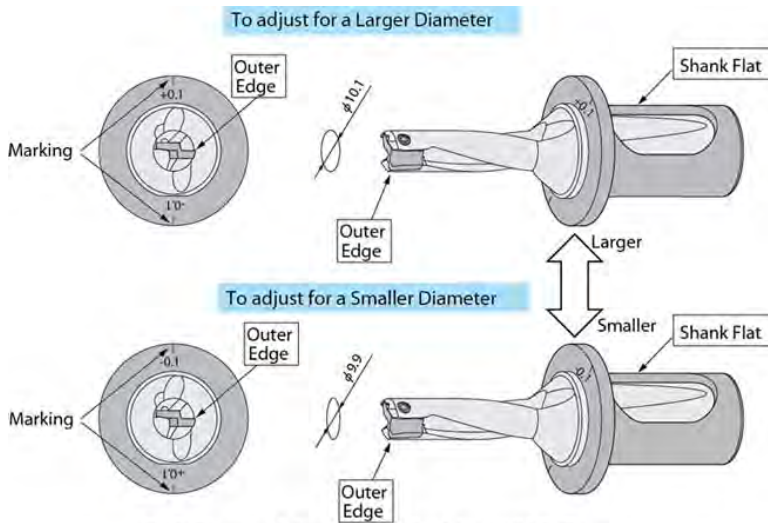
Diameter Adjustment Method (e.g.)φ10 Drill
